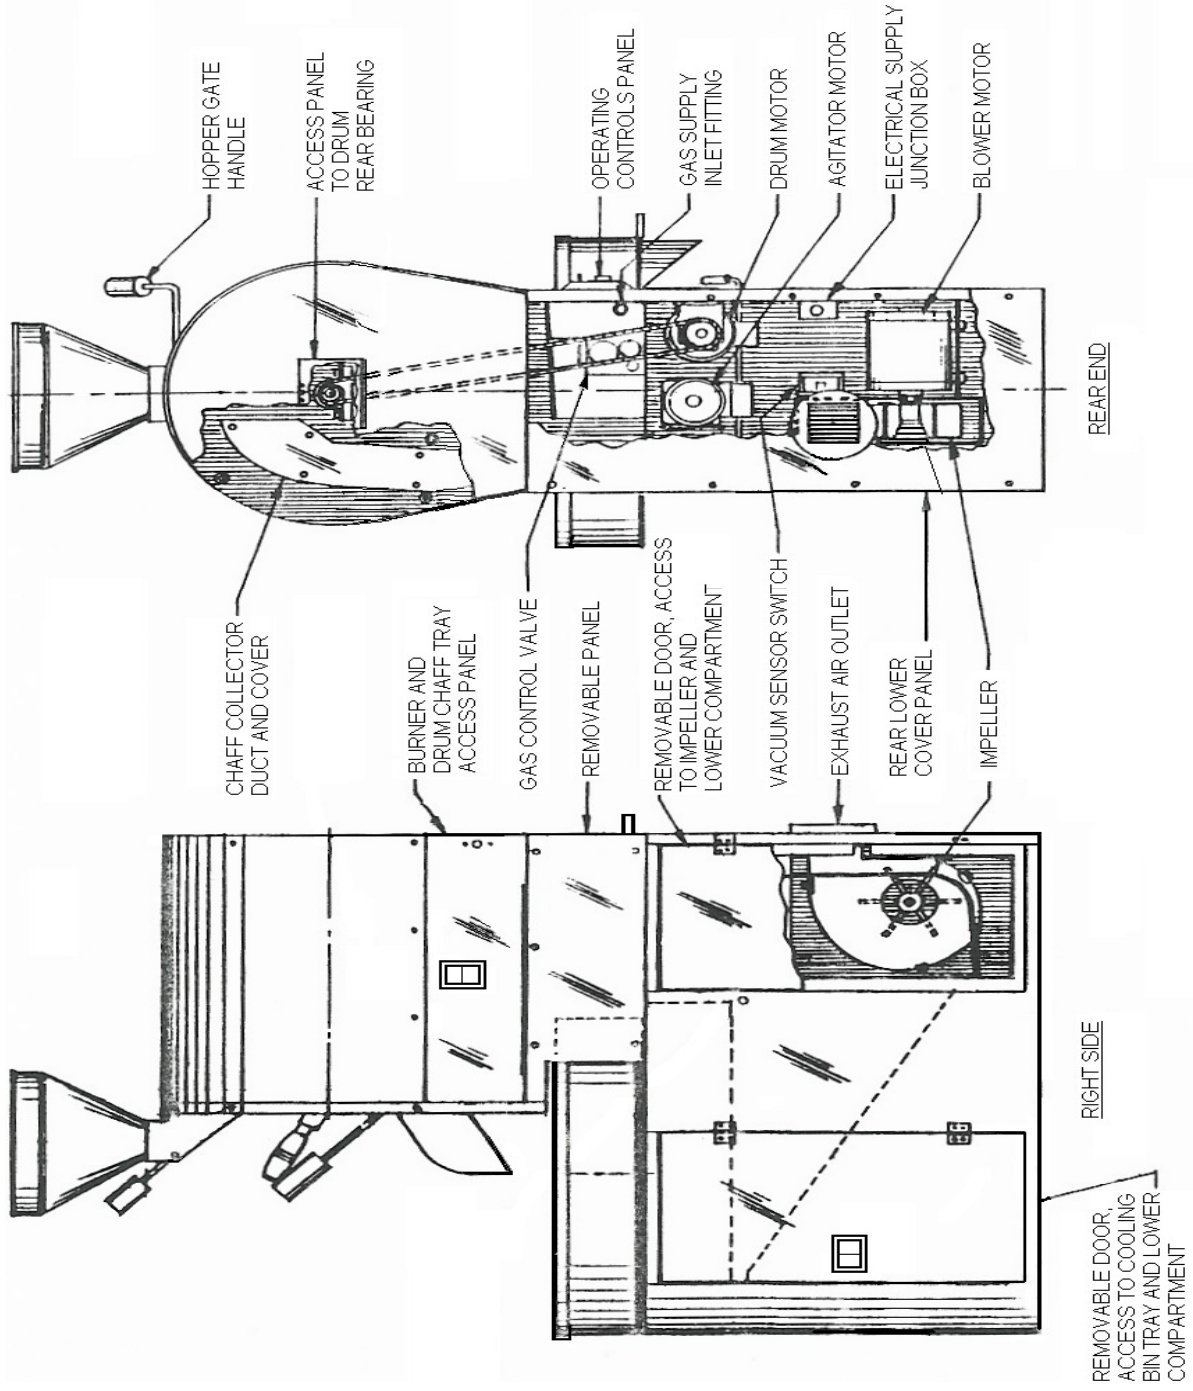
ROASTER RIGHT SIDE and REAR END VIEWS
